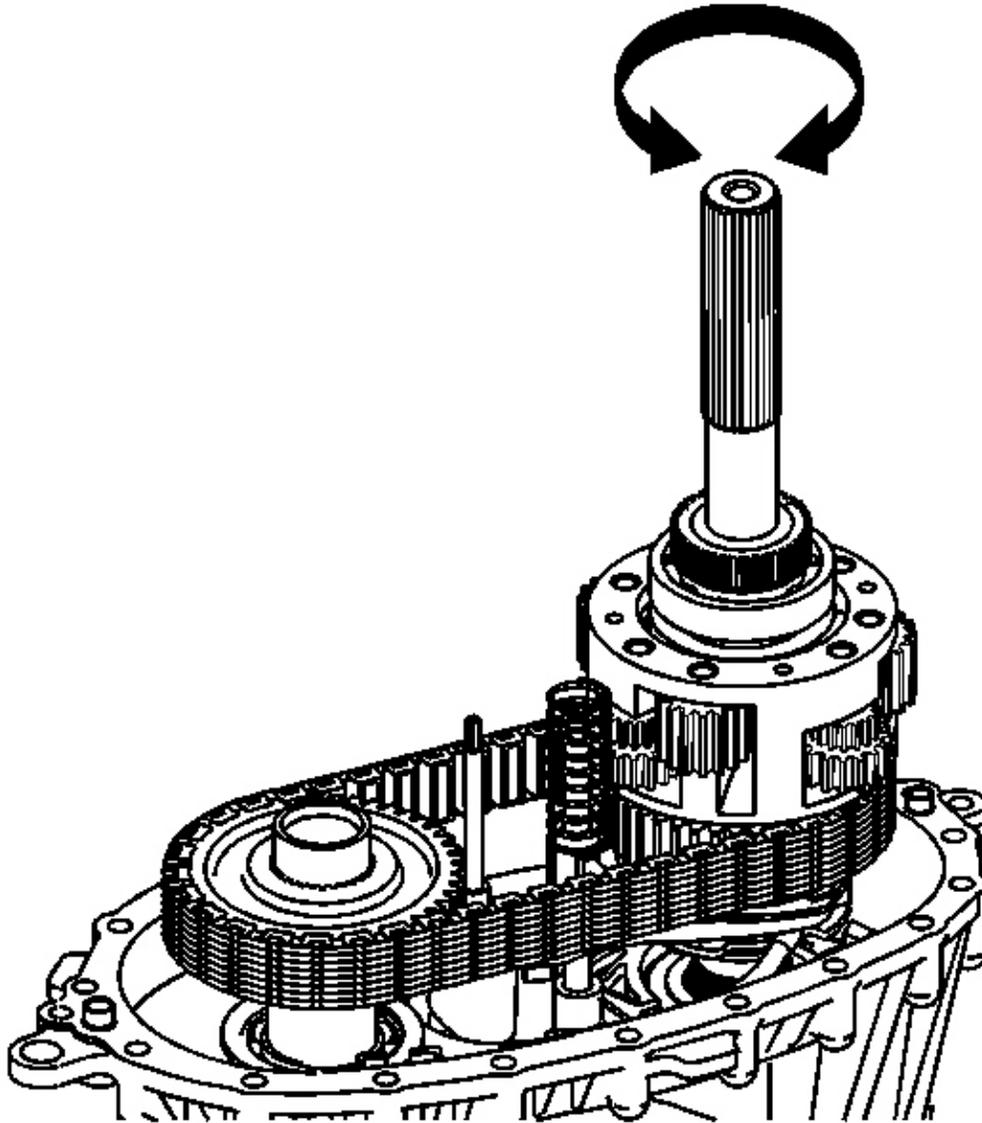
Checking Planetary Differential Pinion Gear Rotation With Rear Output Shaft
